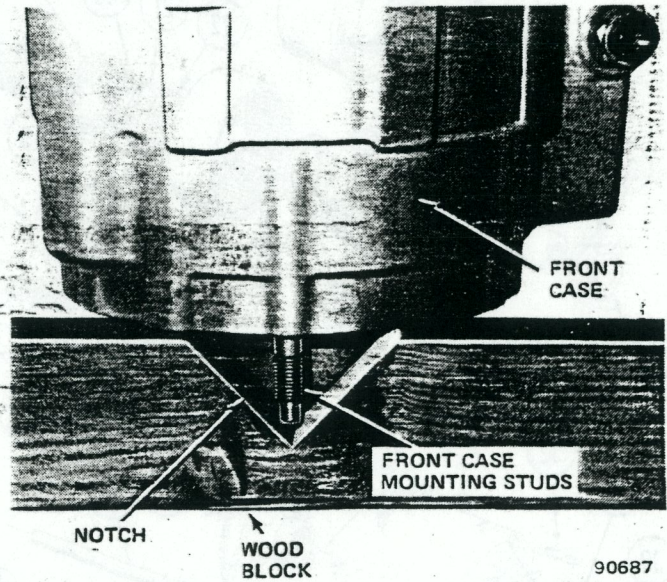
D-46 Mounting Transfer Case on Wood Blocks
